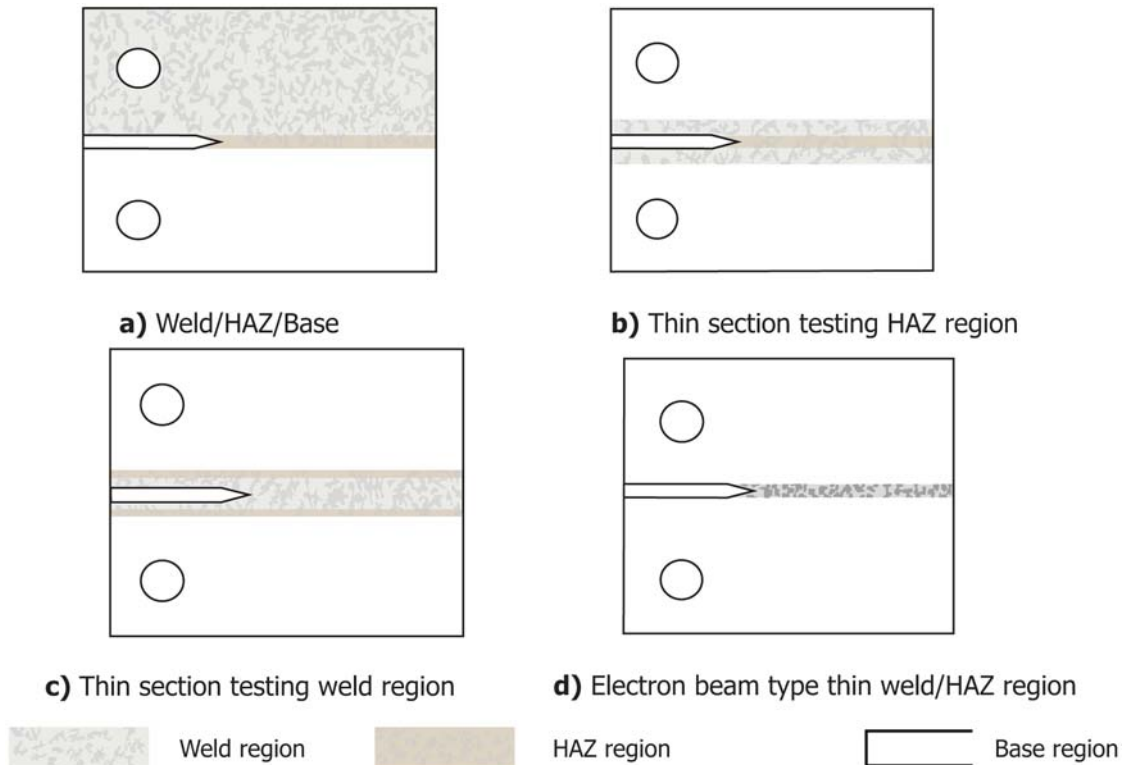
Schematic Configurations of Welded Specimens that Could Be Used to Measure Cracking
